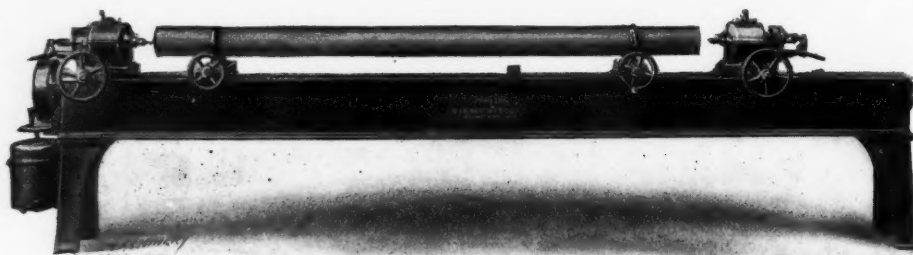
Front View of Pawling & Harnischfeger Centering Machine working on Shaft $7\frac{1}{4}$ Inches in Diameter by 9 Feet, 8 Inches Long
